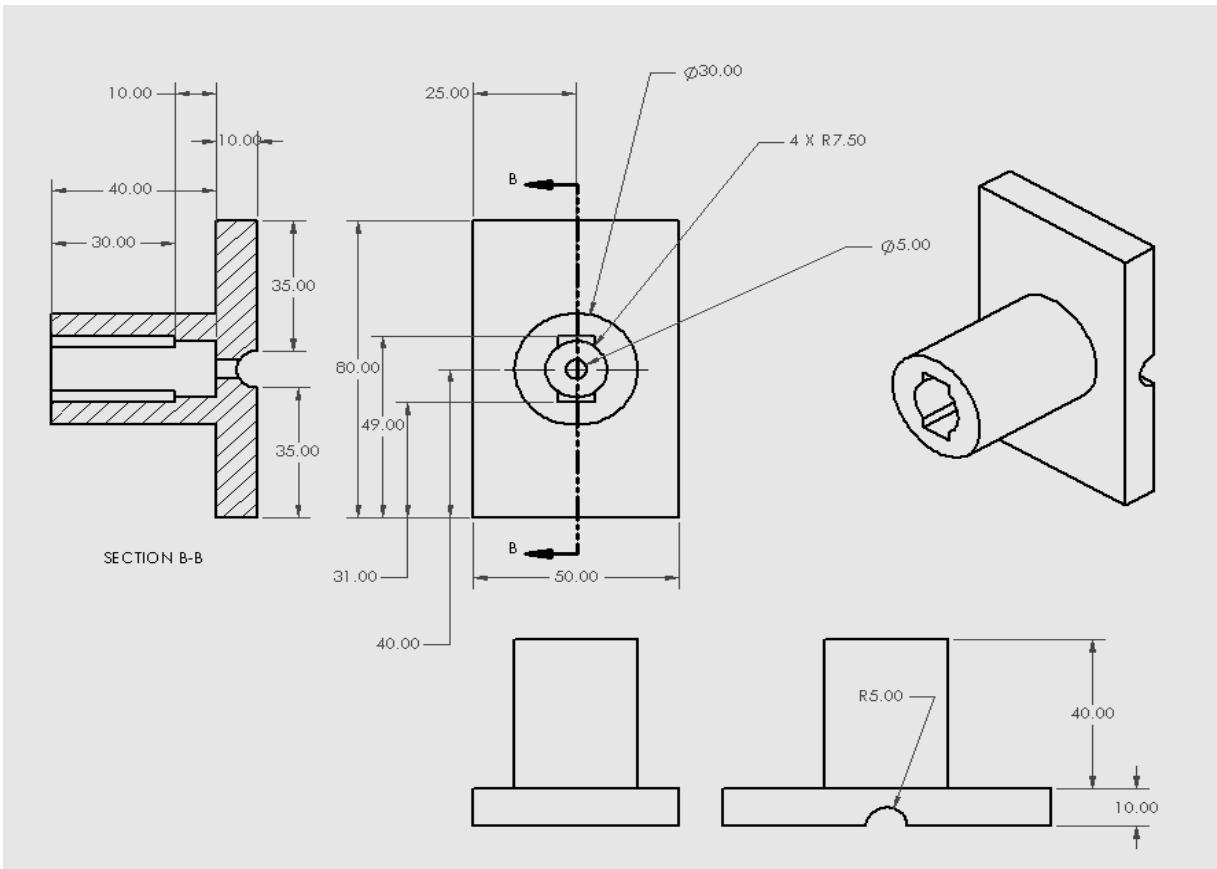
Drawing of the brush holder (Scale: 1:1, unit: mm).
